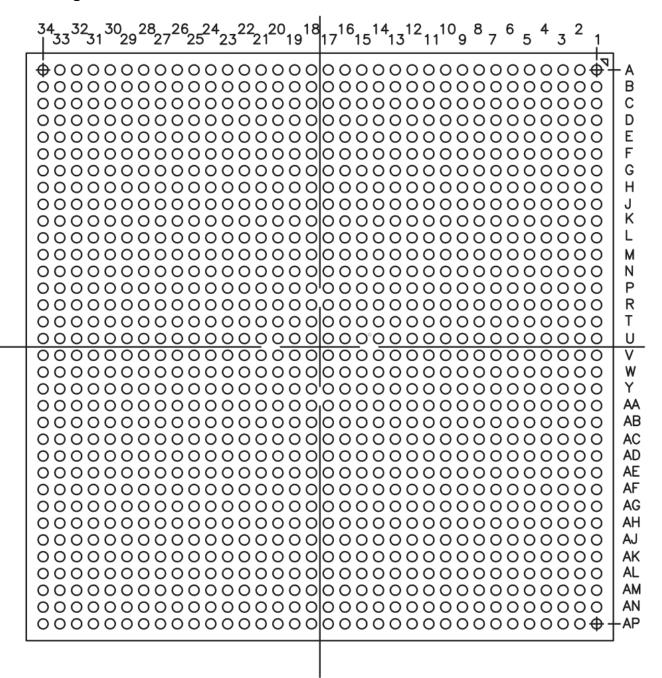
ZUM Package, 1158-Pin FCBGA, Bottom View
